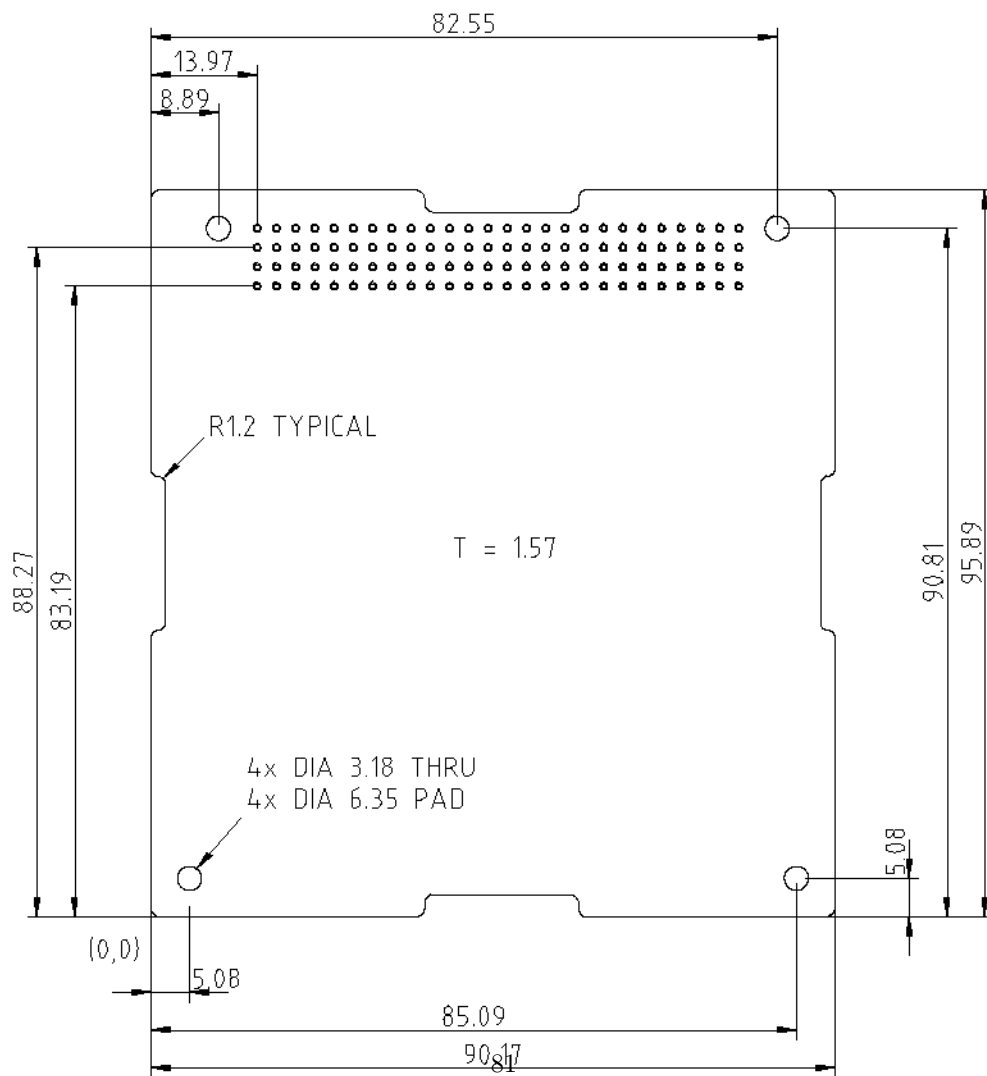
LibreCube mechanical drawing (dimensions in mm)
